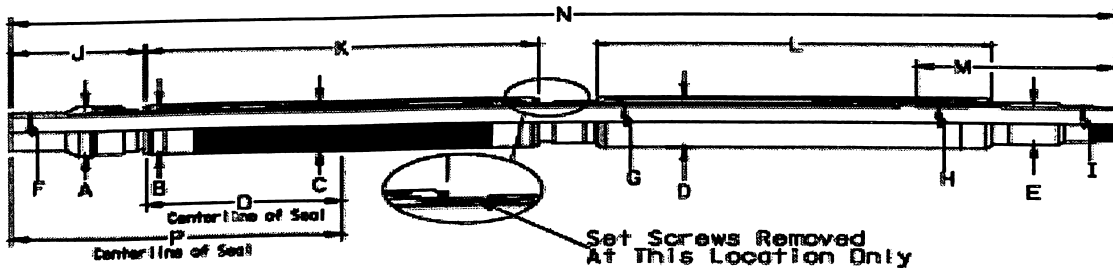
"MPas" External Casing Packer Dimensional Data Drawing
